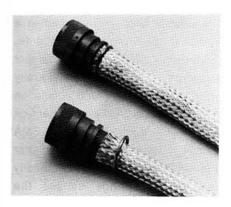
Welded Ni-Ti-Nb wire rings are shrunk onto copper braid by electrical resistance heating.
